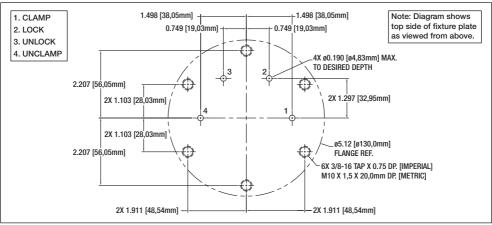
, Mounting Dimensions, Models MPFL-300V, MFPN-300V, MPFR-300V, WPFL-300V. WPFN-300V
